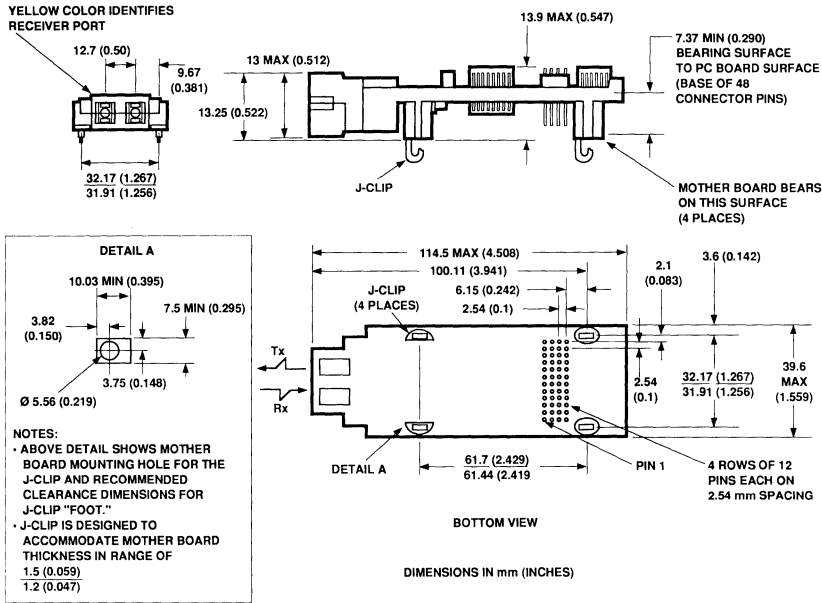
Optical Link Card Dimensions and Recommended Mounting Dimensions.
